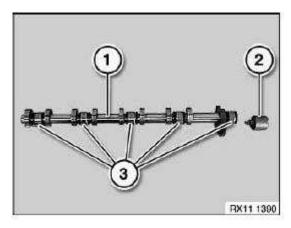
Identifying Eccentric Shaft, Magnet Wheel And Needle Bearings Courtesy of BMW OF NORTH AMERICA, INC.
